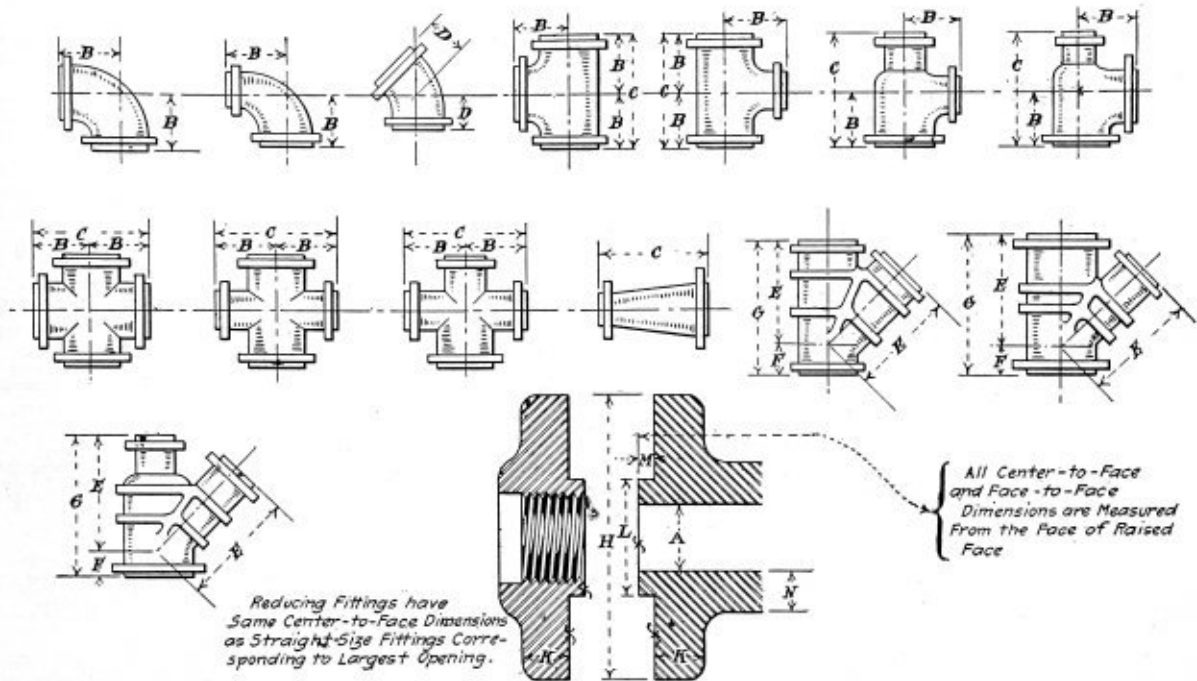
Hydraulic American Standard Flanges and Flanged Fittings Dimensioned in Tables 2, 3 and 4
